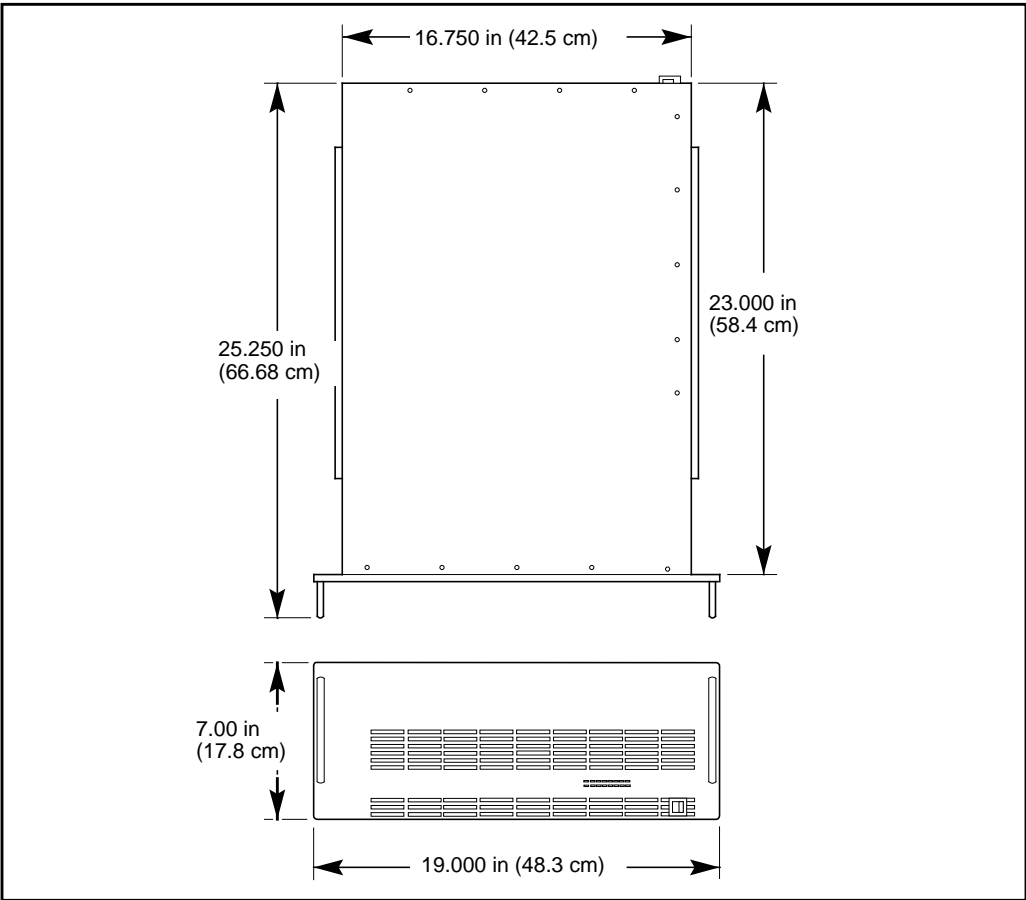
Dimensions of the PDX103 for Rack Mounting
